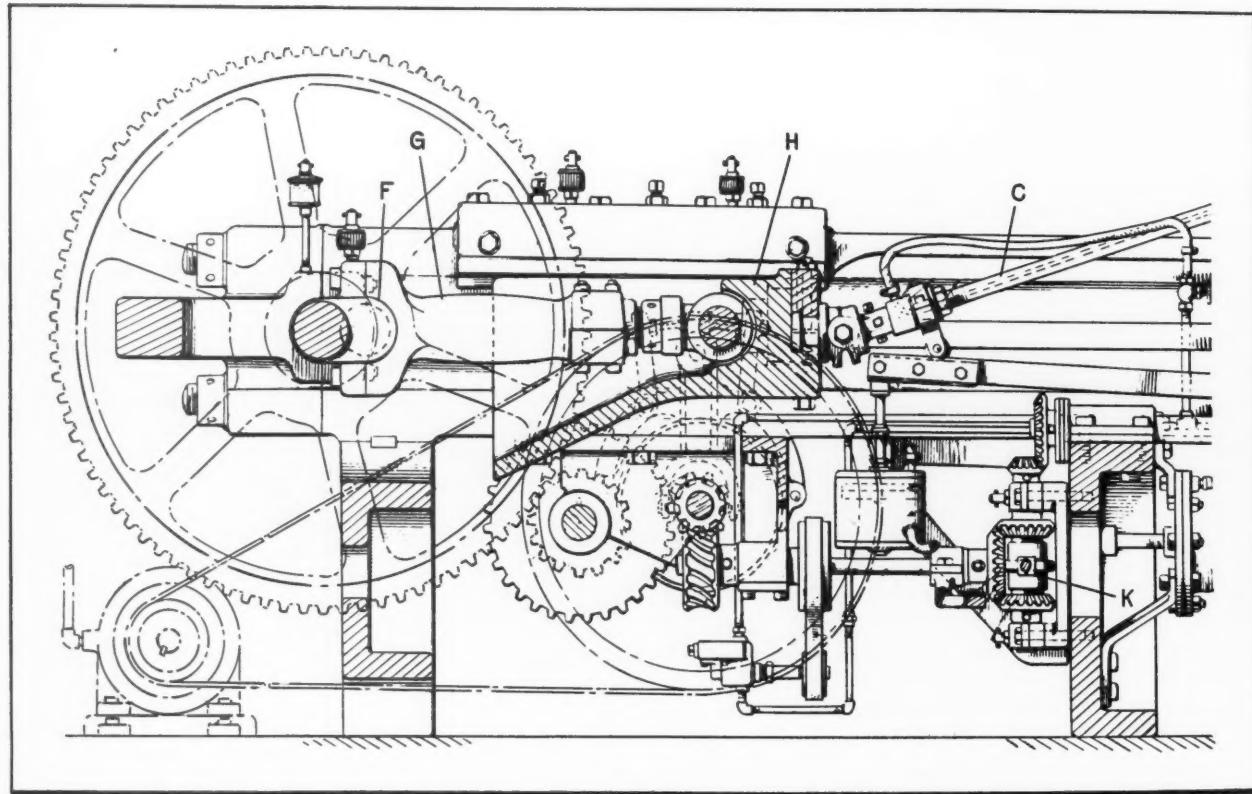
View of Left-hand Section of Tube-drawing Machine, Showing Crank Mechanism which Drives the Tube Pushing and Pulling Members—Reproduced from Original Drawing
